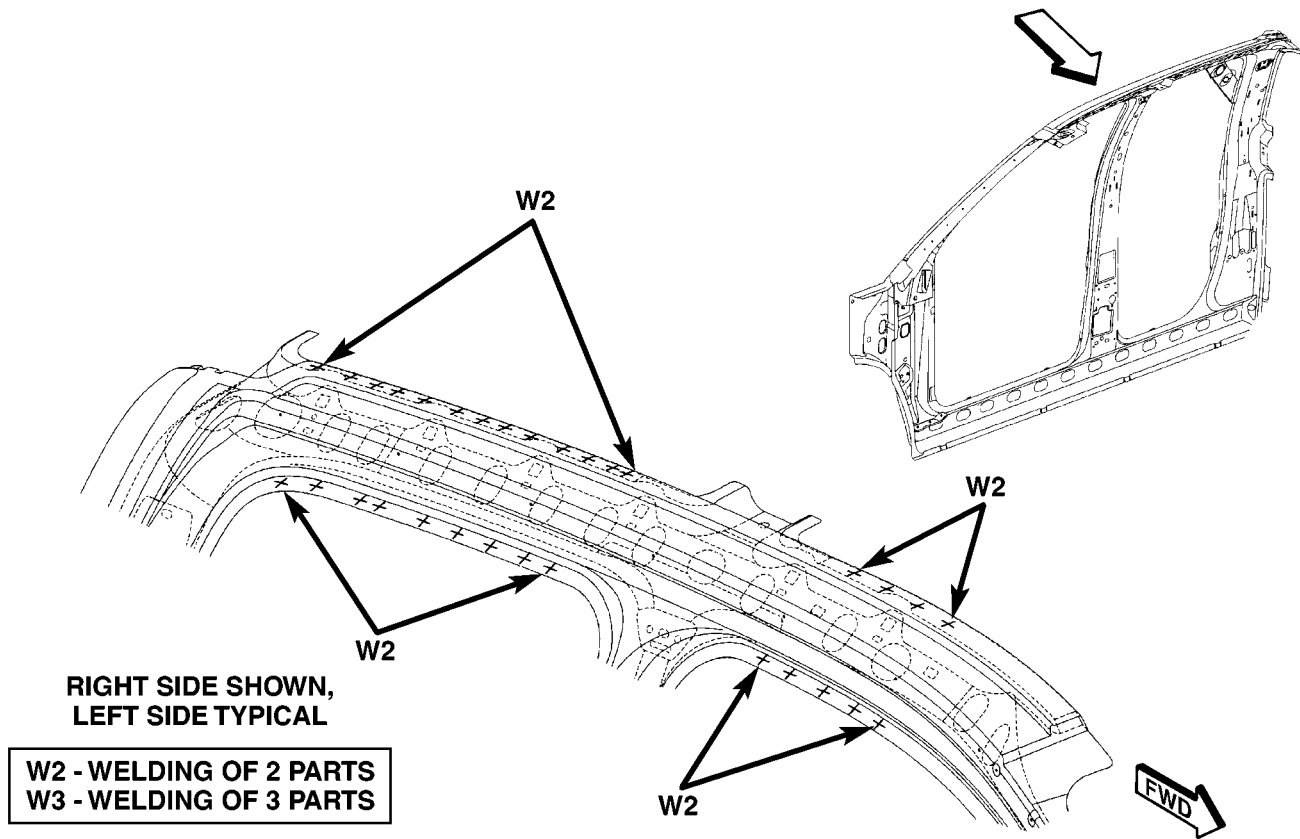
OUTER BODY SIDE APERTURE - QUAD CAB
